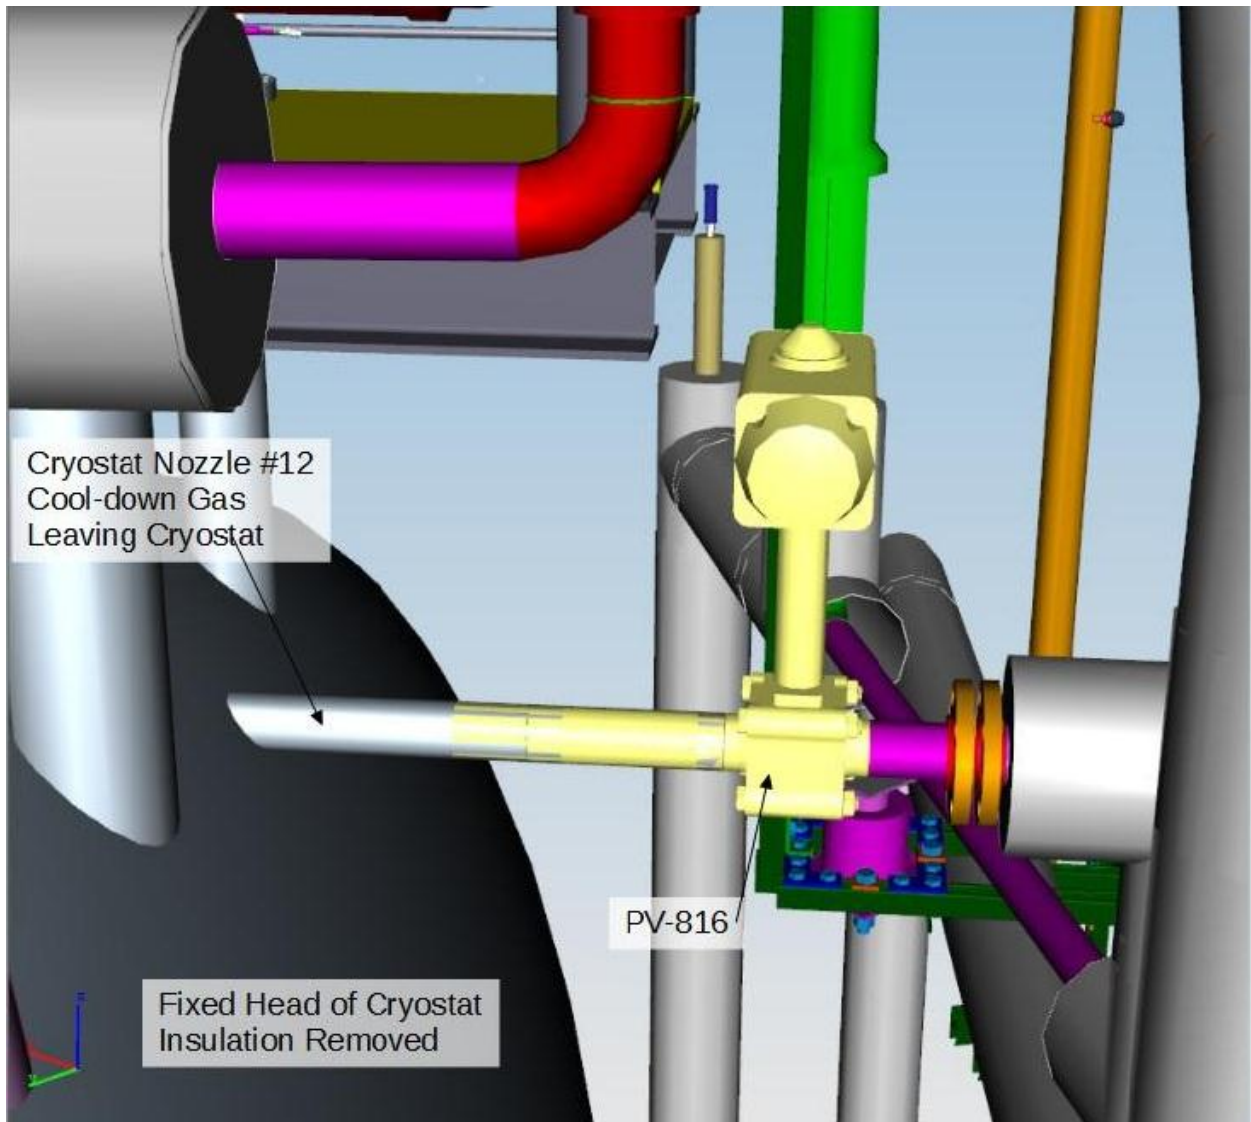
Pipe from nozzle #12 on the top of the cryostat fixed head that connects to PV816 for the return of the cool-down gas from the cryostat.
